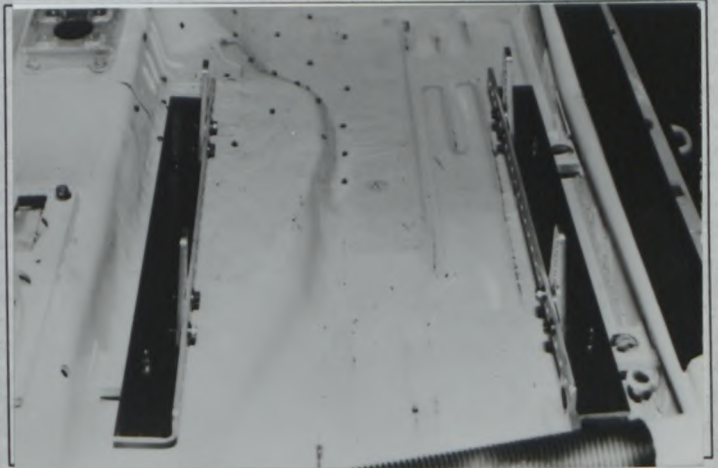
Seat support and anchorages left hand TYPE B
